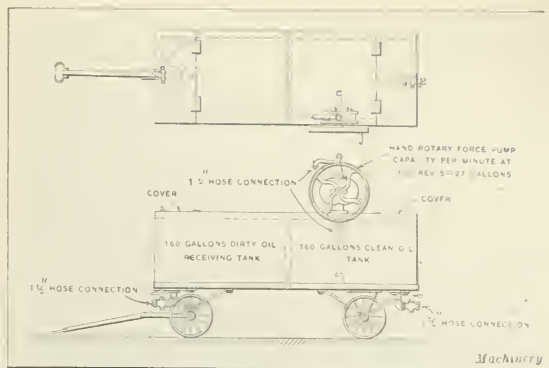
Truck used for removing Dirty Oil from Machines and substituting Supply of Clean Oil
